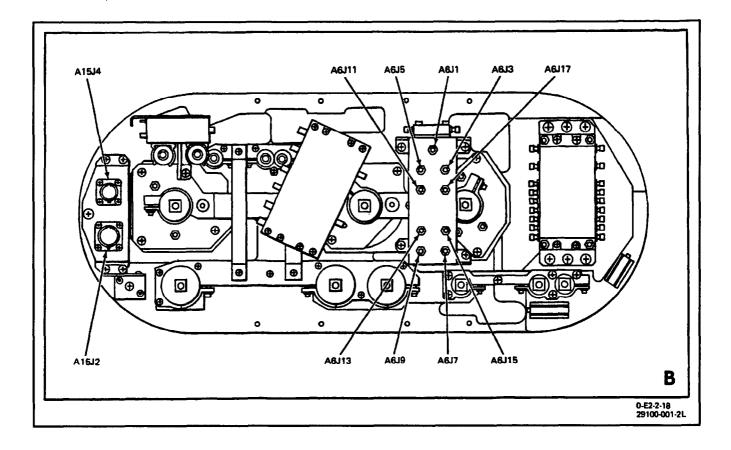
Removal and Installation of Antenna Assembly AS-3494/ALR-73 (Sheet 2)
